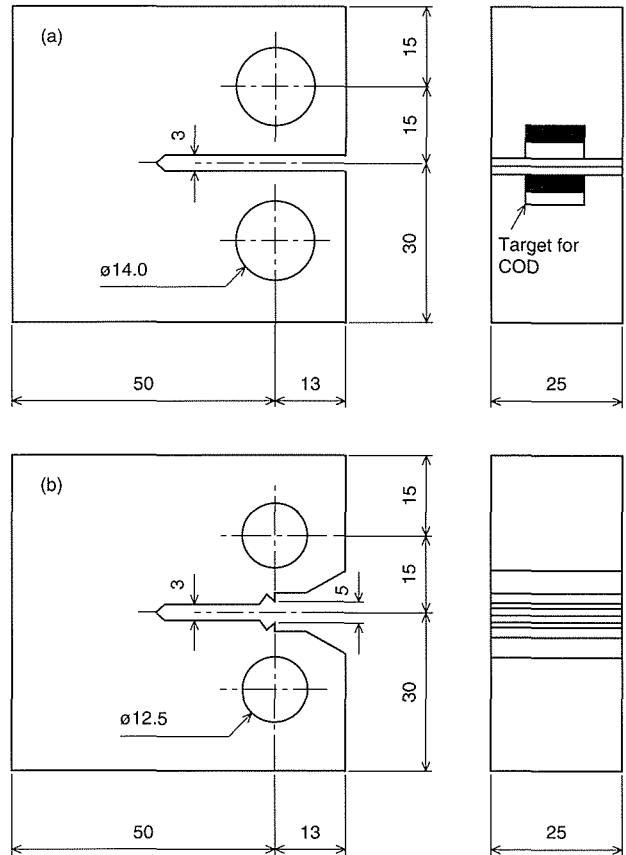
Configurations of the compact tension specimens for a drop-weight type tensile machine (a), electrohydraulic type and Instron tensile machines (b).
